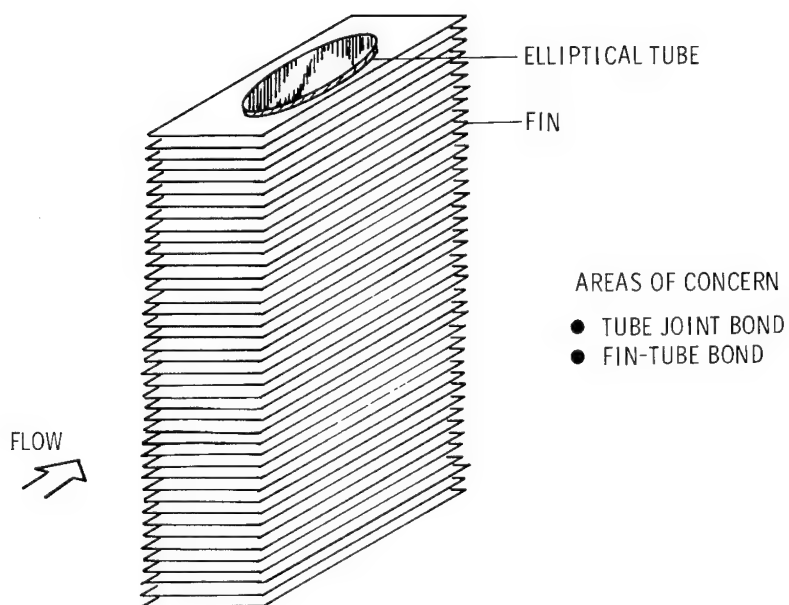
Sketch of elliptical fin-tube used in cooling coil.
